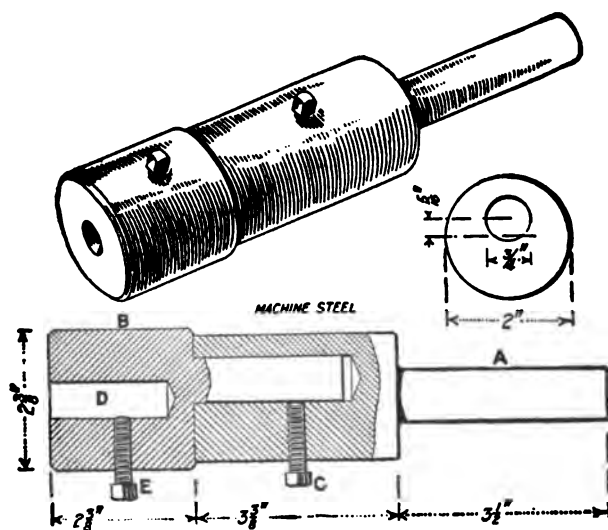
ADJUSTABLE BORING TOOL HOLDER
